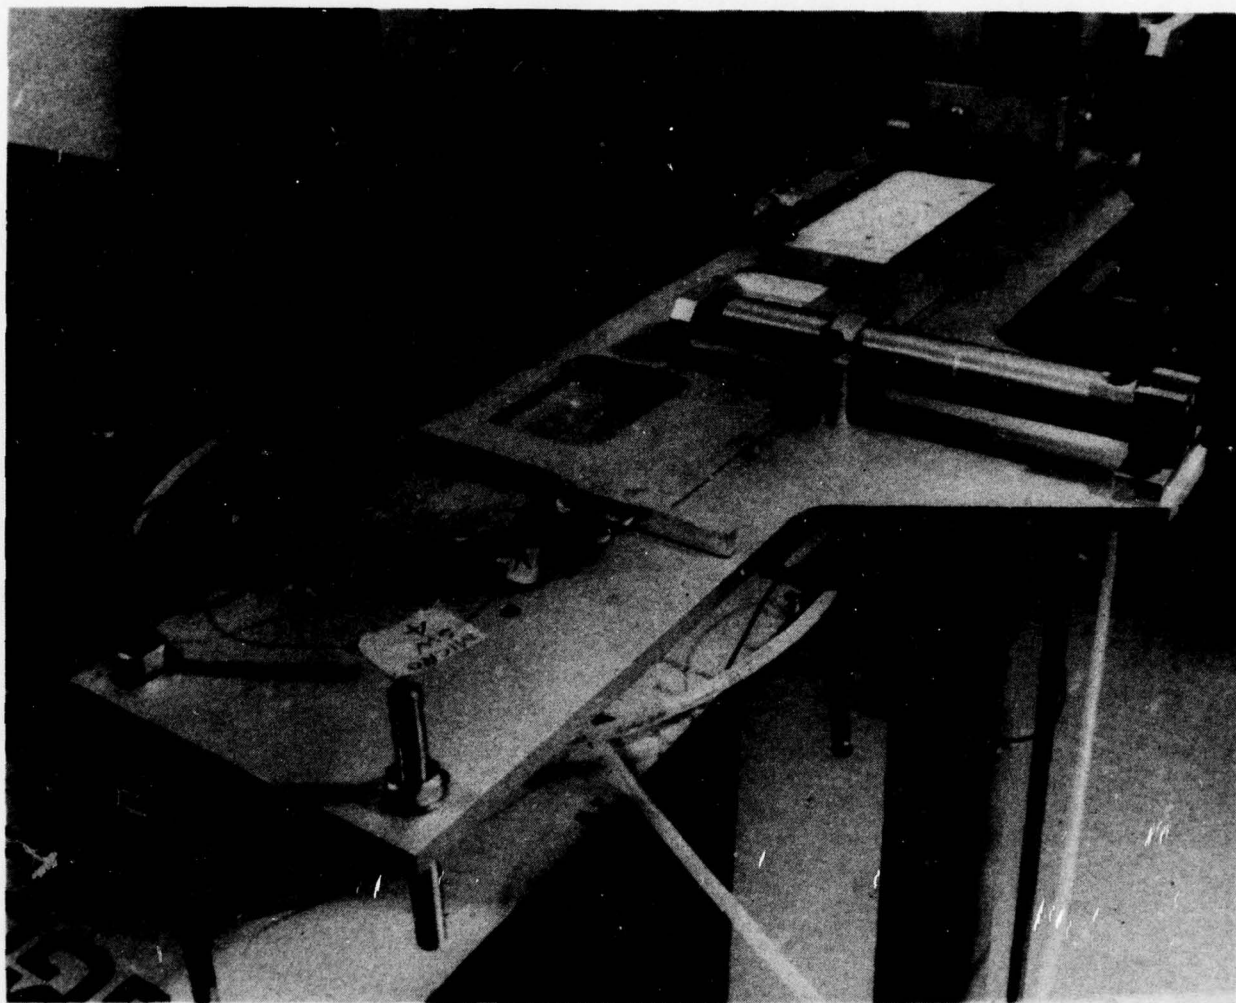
FURNACE ON-LOADER - BELT LOADING MECHANISM
